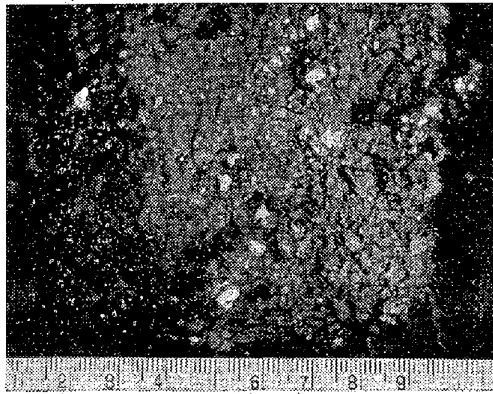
Sand mark on the surface of a steel ingot (Sample D).
